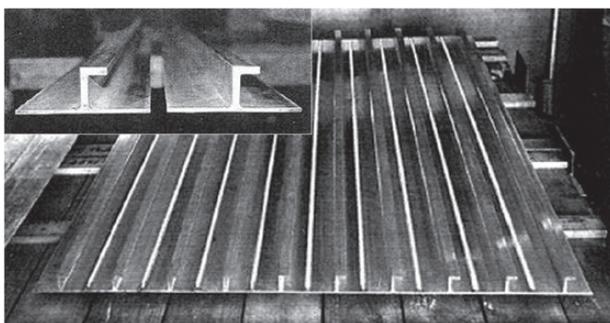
Integral wing panel made by FSW (friction stir welding), (1531 mm wide, 2700 mm length), 7050 alloy extruded shapes before FSW are shown in the picture of the left shoulder ⁷⁰⁾.
